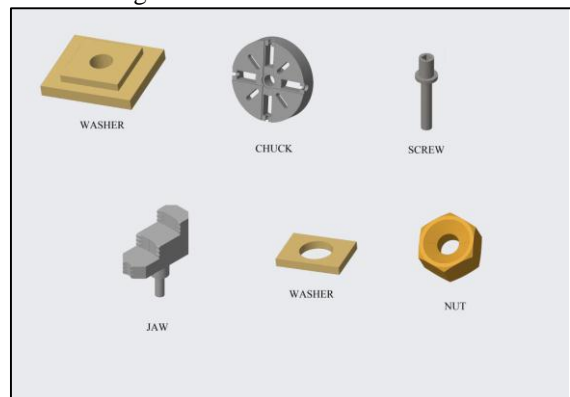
Parts of four jaw chuck assembly are as chuck, washer, screw, jaw, nut
